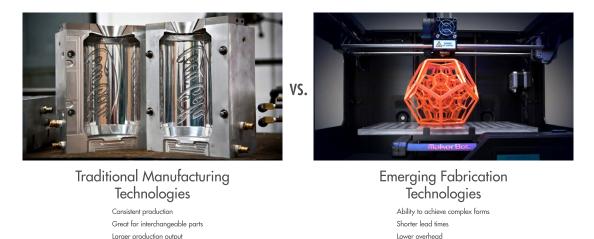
Traditional Manufacturing vs. Emerging Fabrication Technologies
